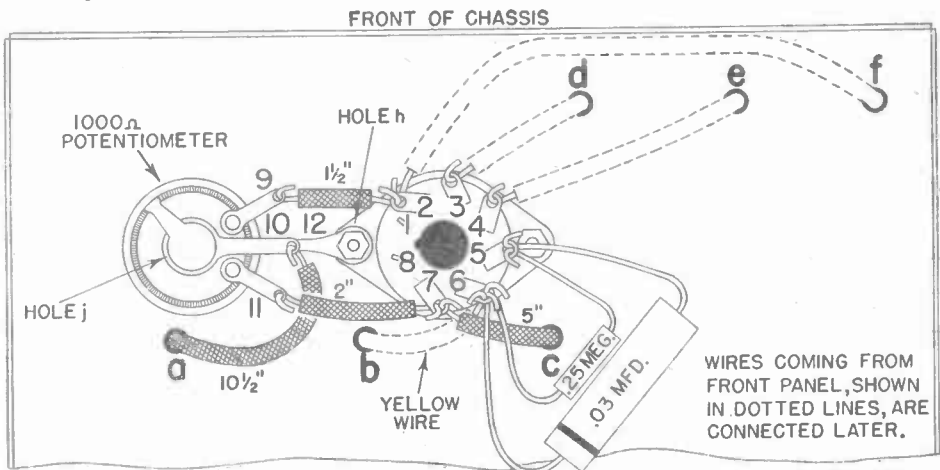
Bottom view of chassis, showing preliminary assembly of leads and wires. After the chassis is bolted to the panel, four wires from the panel will be run through holes b, d, e and f and connected to terminals 6, 3, 4 and 2, respectively, as indicated by the dotted lines.
